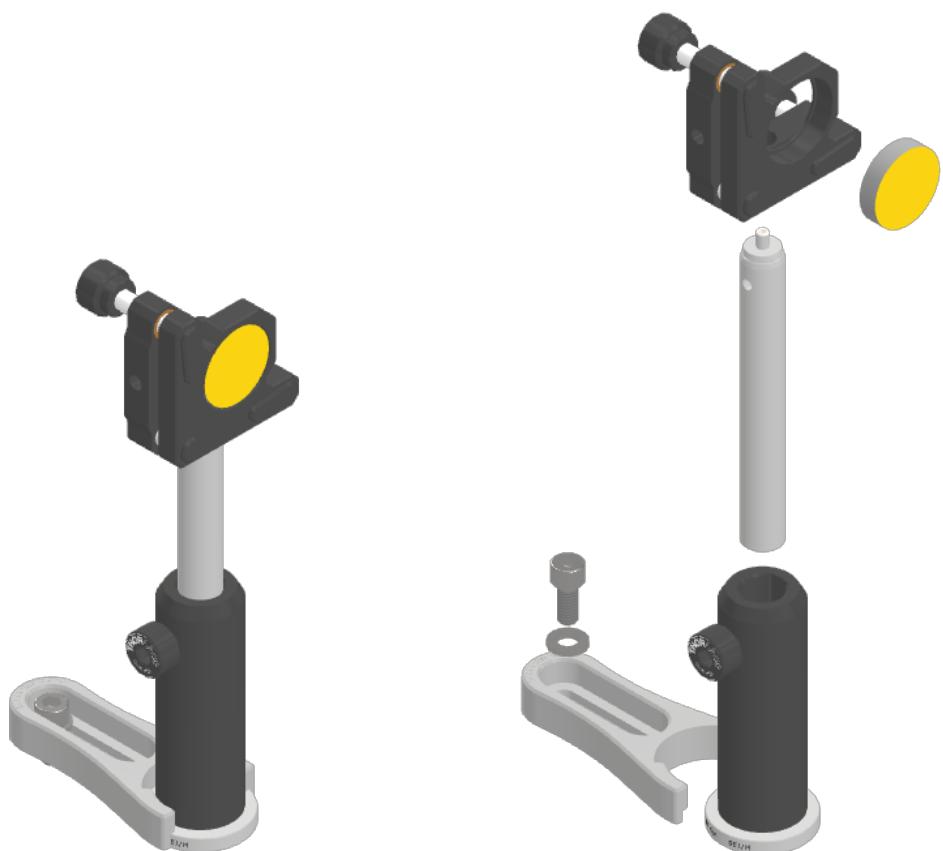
CAD drawing of a typical mounted mirror shown both complete (left) and exploded into constituent parts (right).
